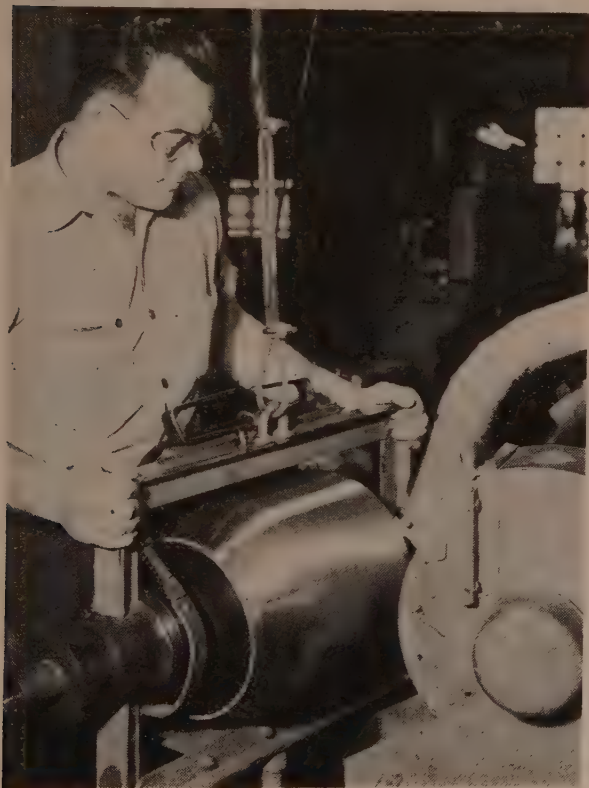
In polishing the exterior of the milker pail, this fixture permits it to rotate slowly on ball bearings when brought into contact with a polishing wheel. The fixture is supported on a column resting in a ball universal joint.
